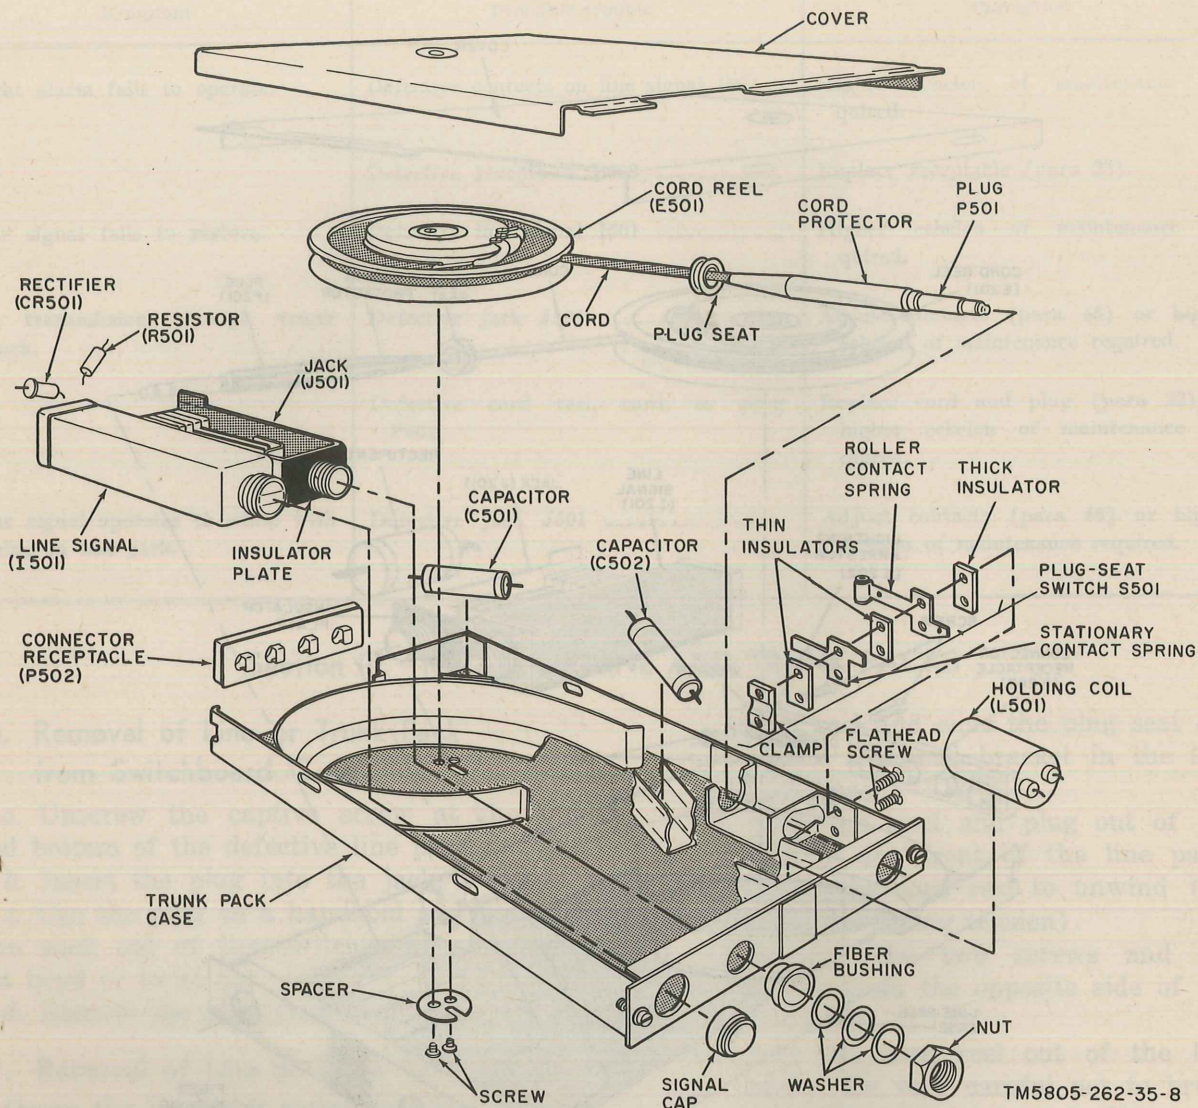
Telephone Circuit, Trunk Jack TA-326/PT, exploded view.
